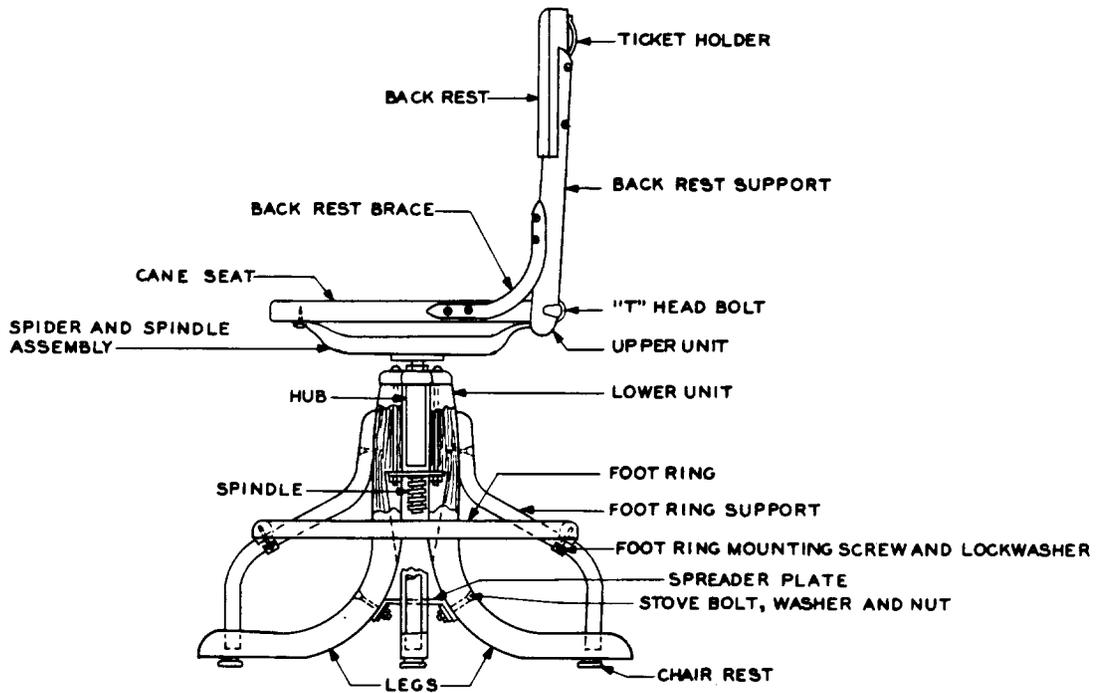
KS-5168 Bentwood-type Operator Chair (Center Spindle)
